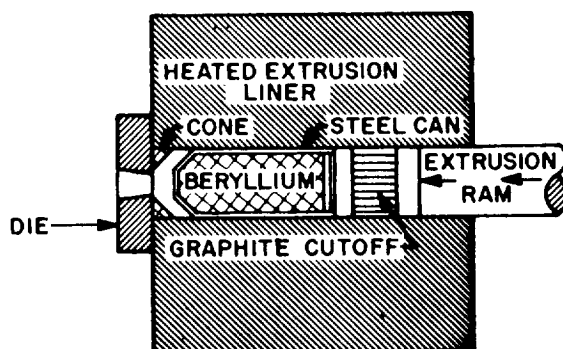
Press Assembly for Extrusion of Be Rods¹⁸
